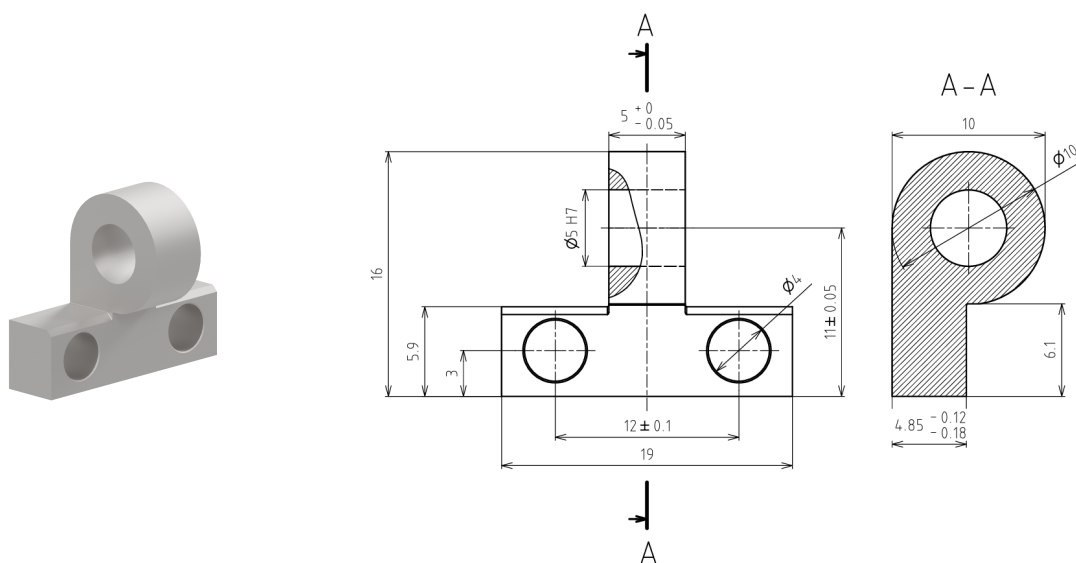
Drawing of clamp 2 (dimensions in mm)
